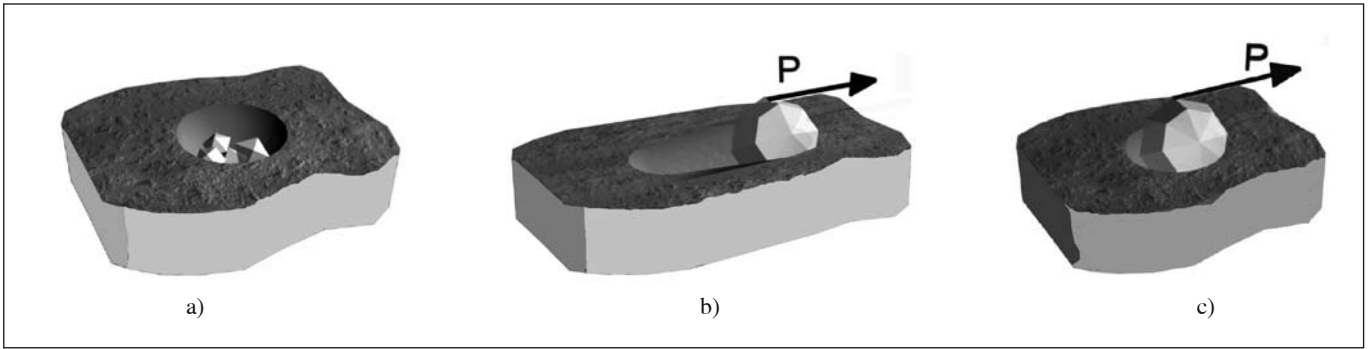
Working surface of the diamond grinding wheel: after the grit breaking (a); after the grit shifting (b); after the grit rotation in the bond (c)
